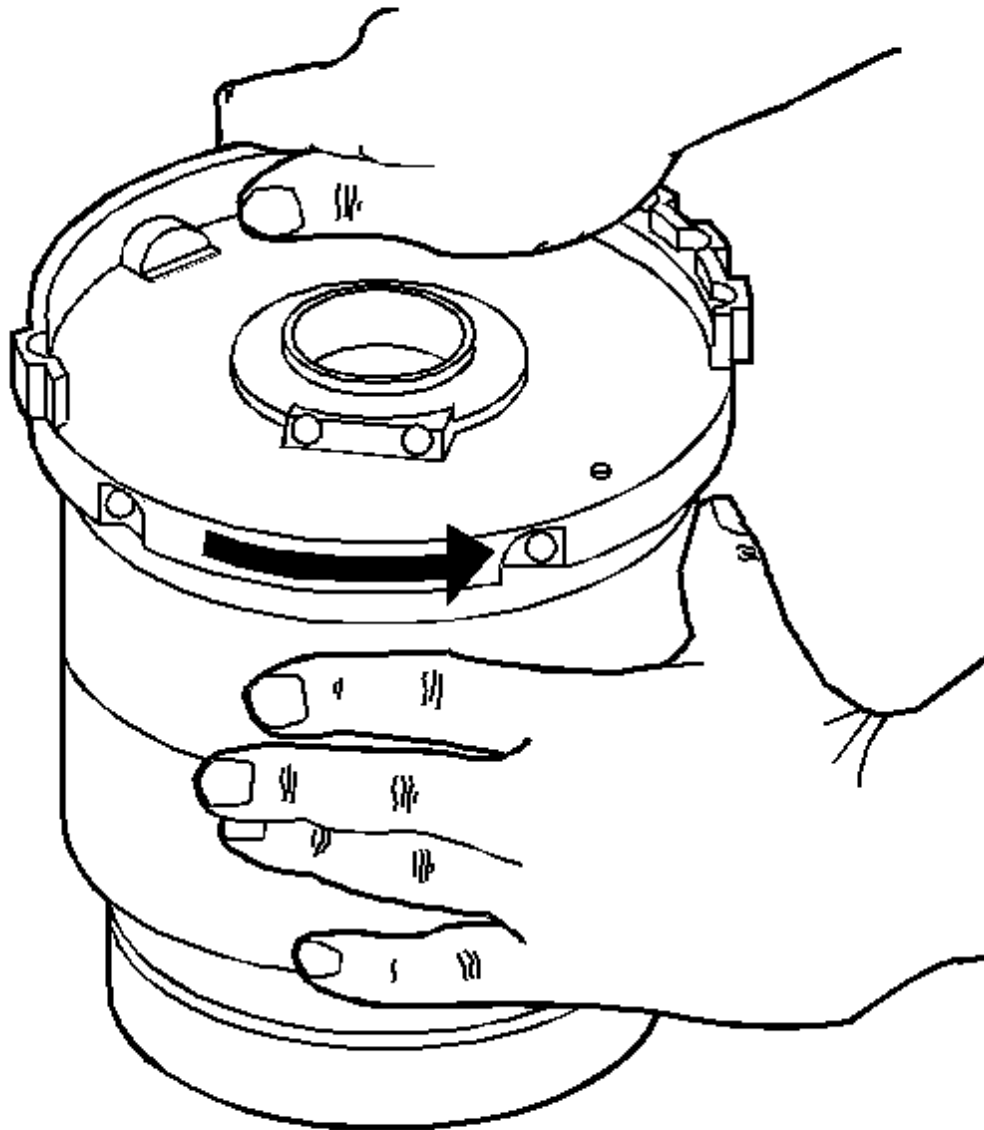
Checking Low Roller Clutch Assembly Rotation
